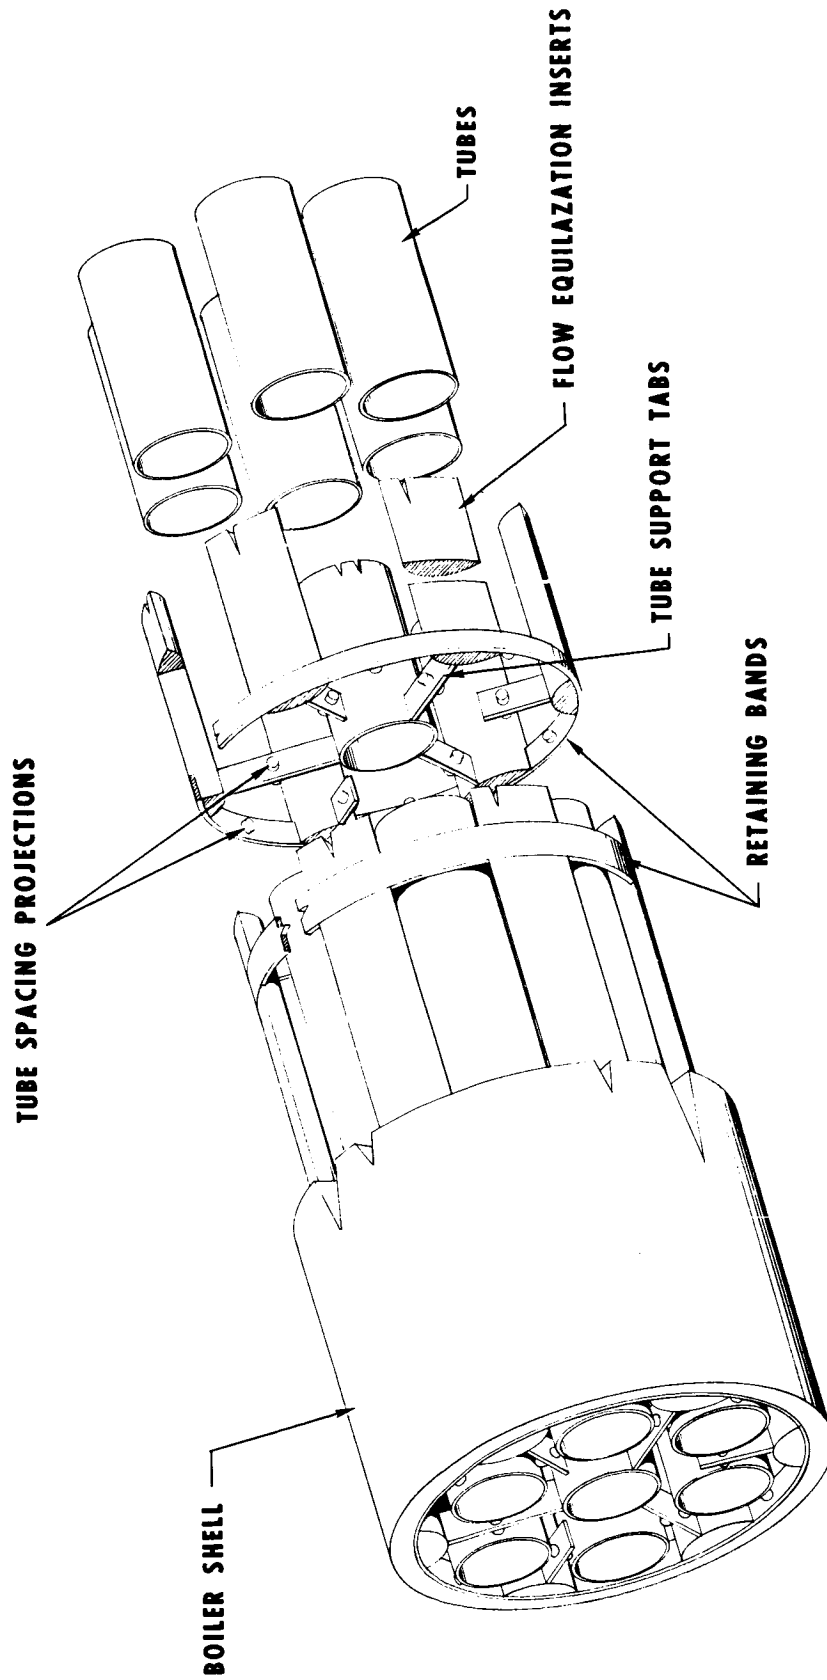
Exploded View Of Tube Bundle - 300 KW Facility Boiler
